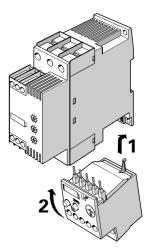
Mounting to the 3RT contactor/3RW3 softstarter
